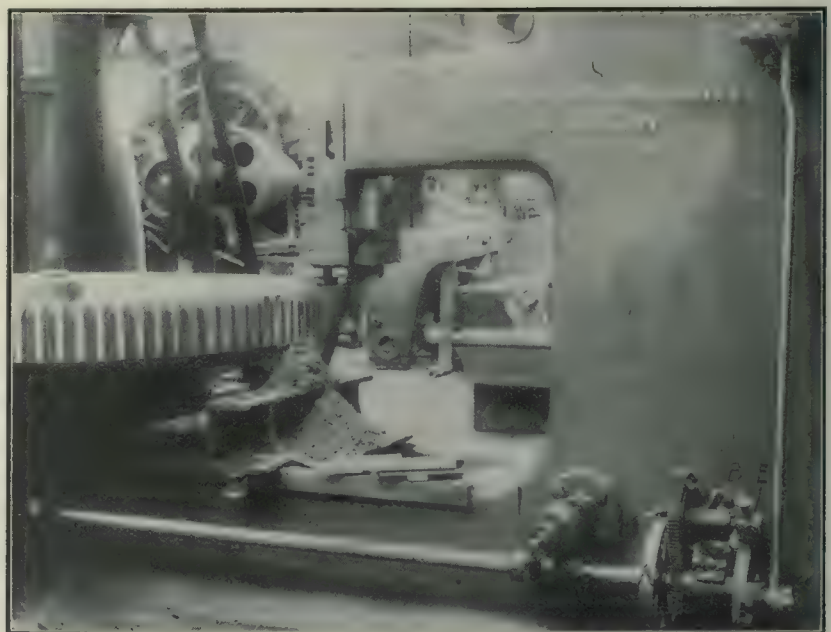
Cutting Large Gear on Slotter, John Bertram & Sons.
